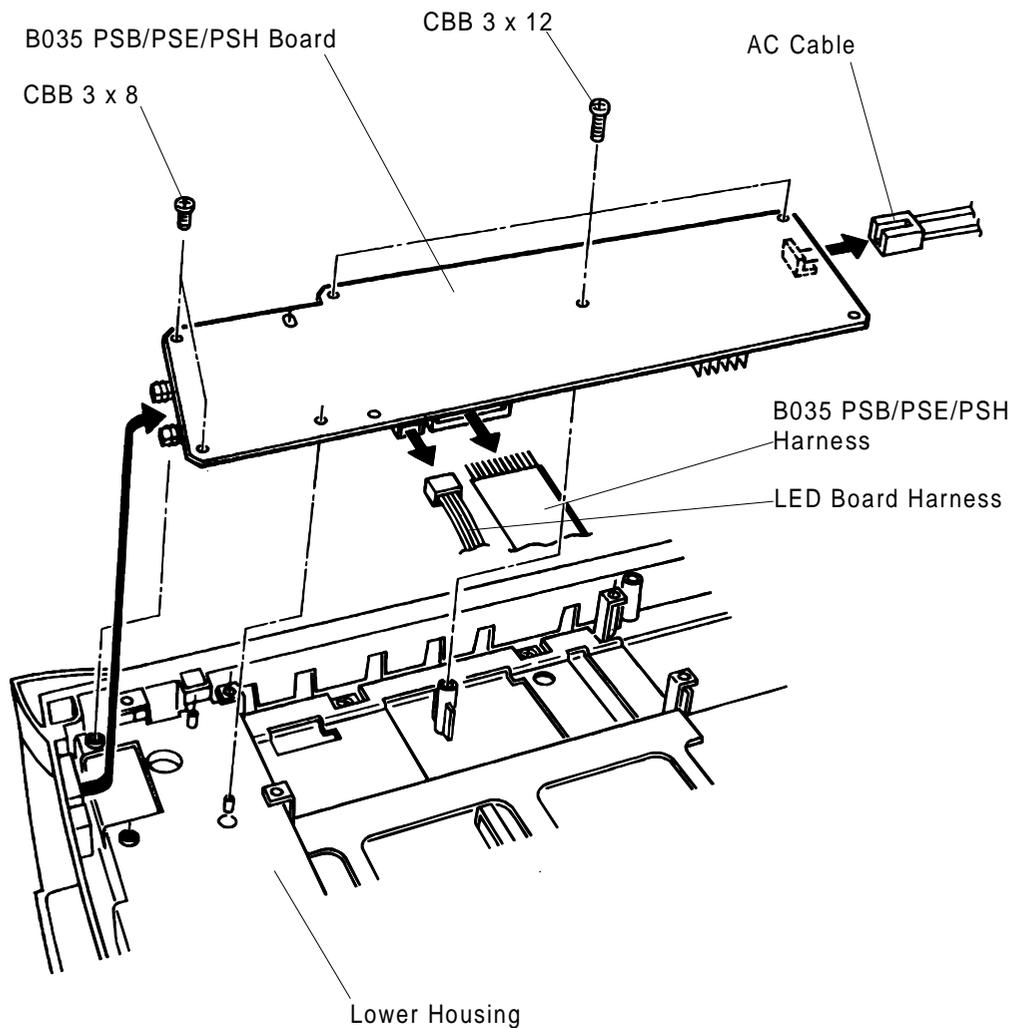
Removing the B035 PSB/PSE/PSH Power Supply Board
